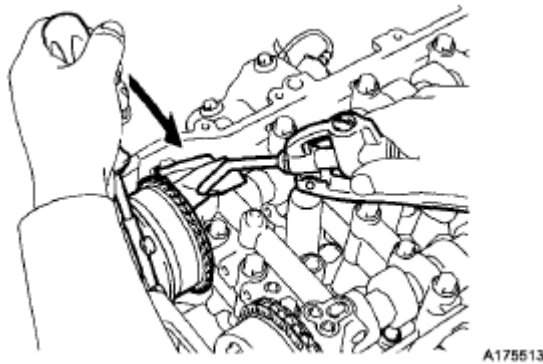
Identifying Camshaft Timing Exhaust Gear Sealing Area
